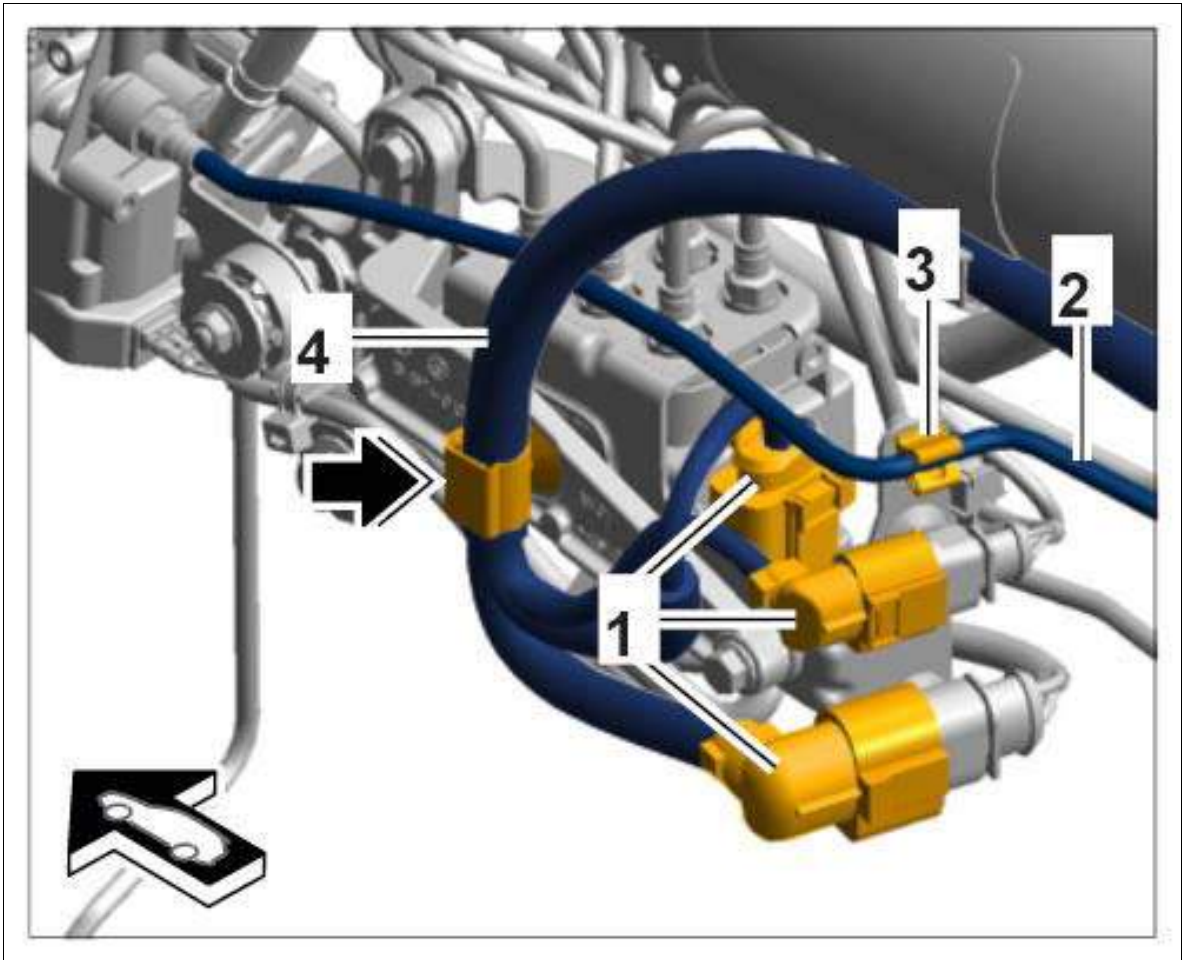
Identifying Compressor Unit With Holder And Valve Unit
